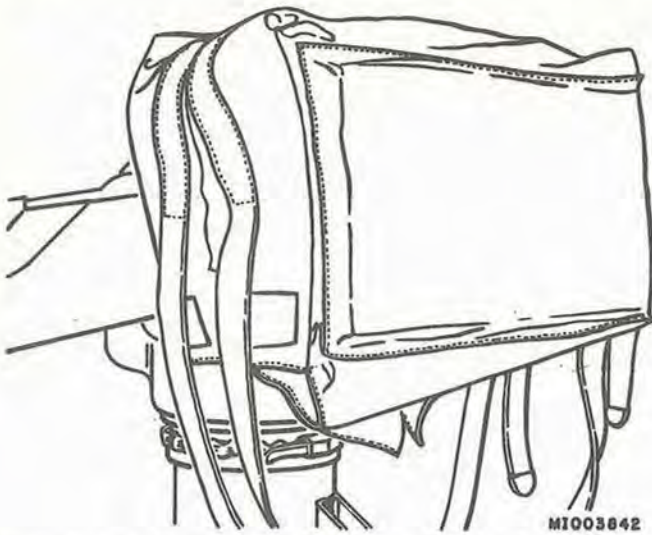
Shroud assembly bag protecting the optical sight on an assembled launcher.
